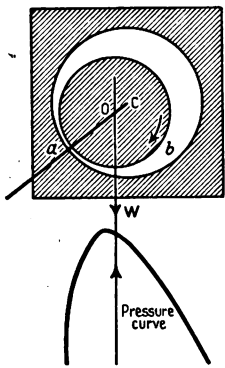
Transverse section of a horizontal shaft rotating in a bearing.
